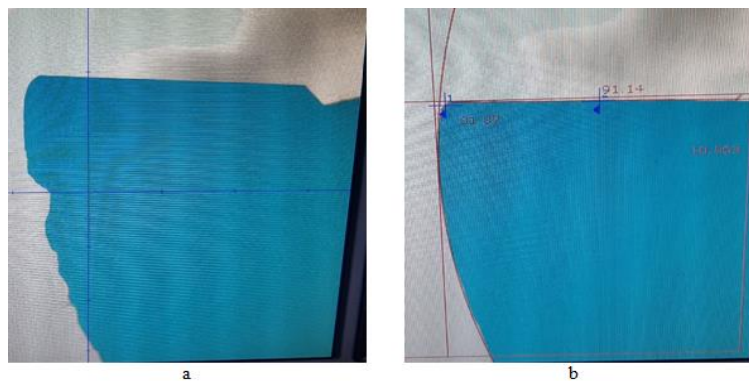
Images obtained on Zoller equipment for a mill cutter cutting edge – shadow method: a) non uniform wear - magnification 12 x; b) new cutting edge; – magnification 10 x.
